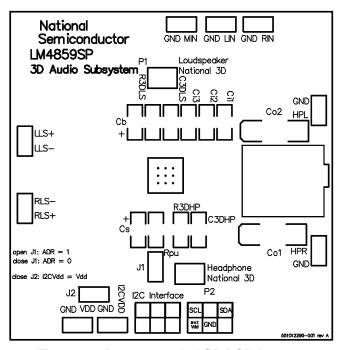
Recommended SP PCB Layout: Silkscreen Layer
